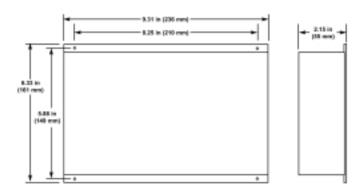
OUTLINE DRAWING - S704VR-EST
